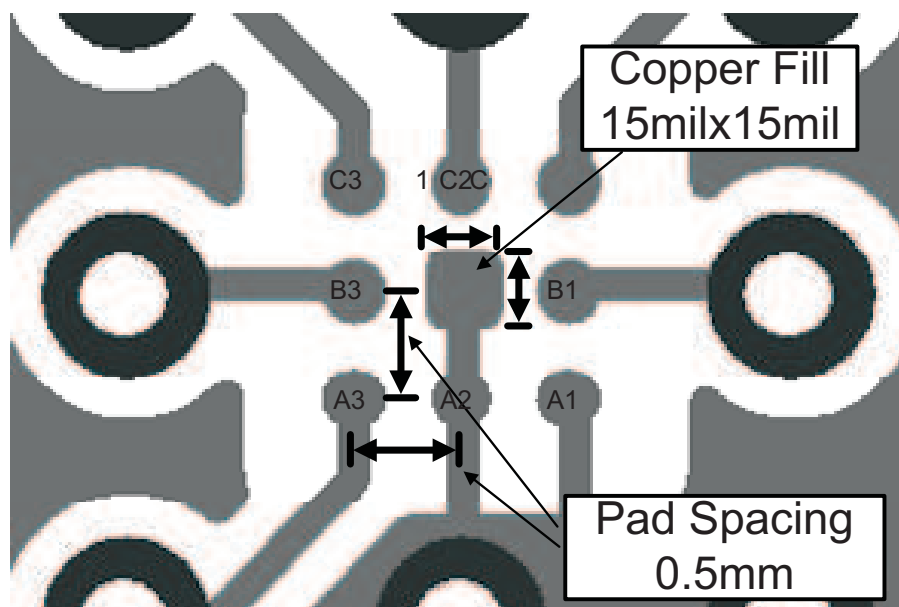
Enlarged View of Layer 1: TMP006EVM Land Pattern and Copper Fill
